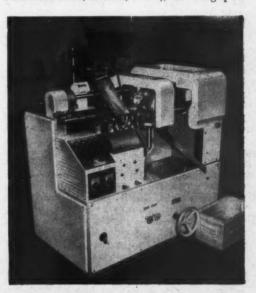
May machine for rolling flutes and peripheral clearances in blanks for twist drills
